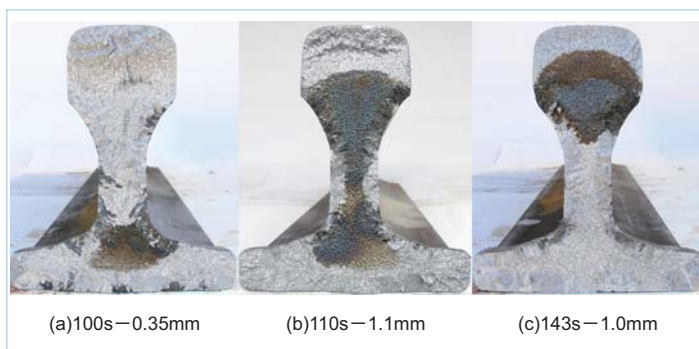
Example of fracture surfaces of the centerline shrinkage reproduced in a simulation test
